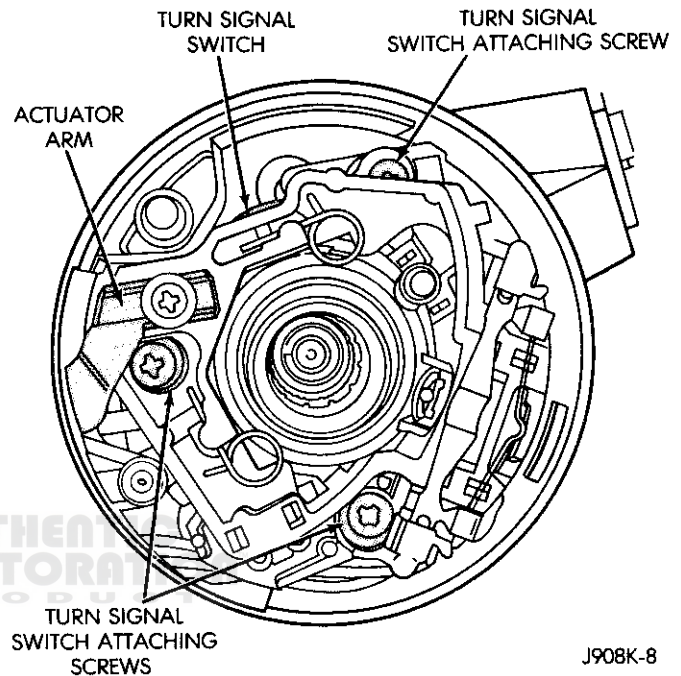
Turn Signal And Dimmer Actuating Lever Screws
